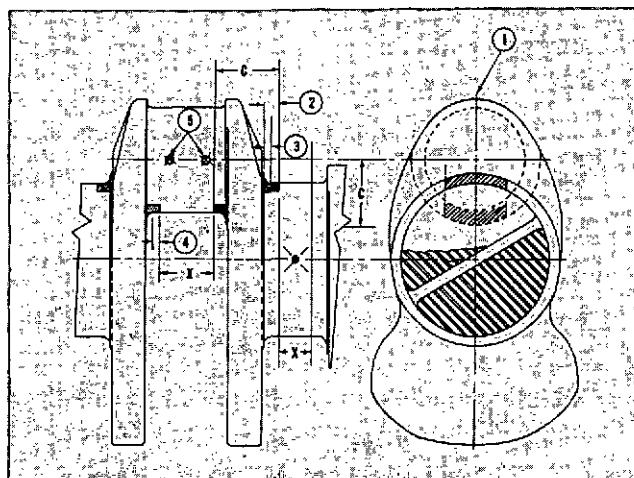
, V40145. Crankshaft magnetic inspection
